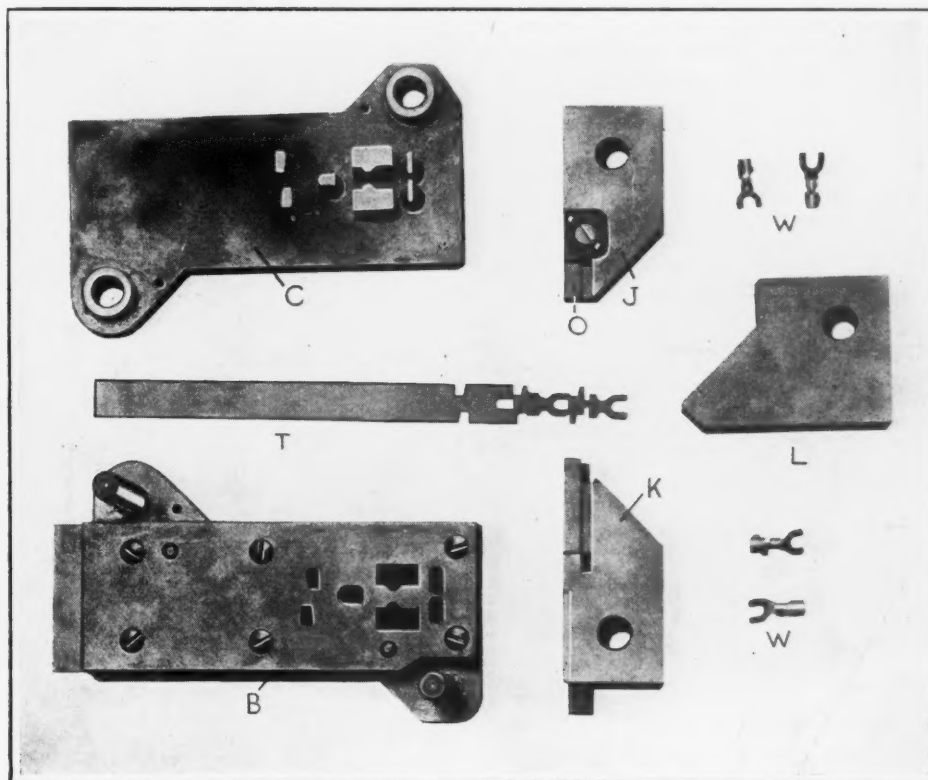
Blanking, Piercing, and Forming Tool Equipment used on Multi-slide Machine for Producing Part W, Shown also at K, Fig. 1
